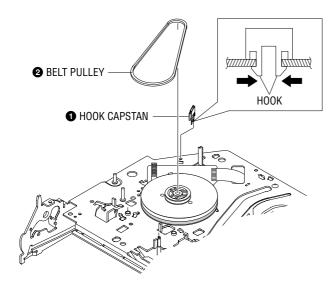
Hook Capstan, Belt Pulley Removal
